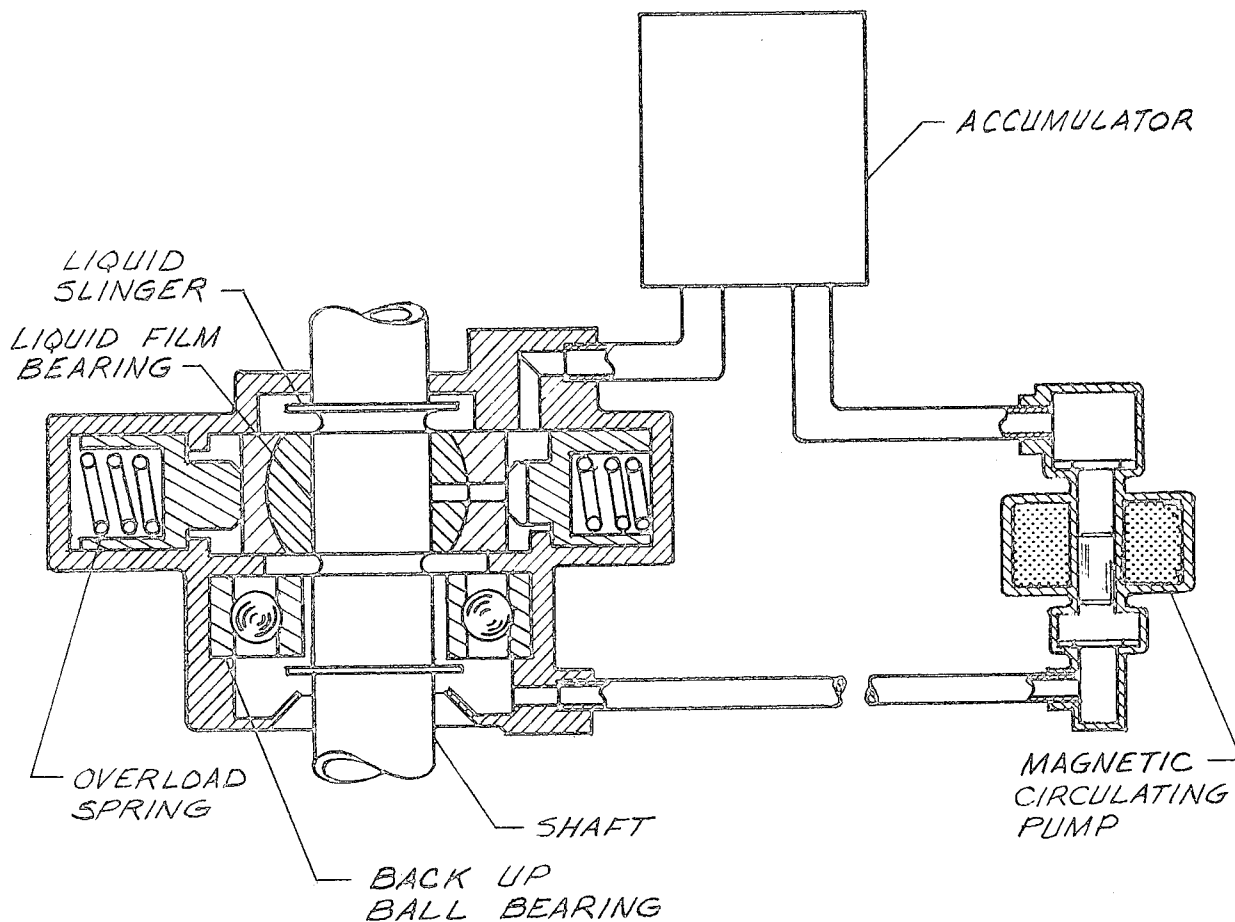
LIQUID FILM BEARING ARRANGEMENT
